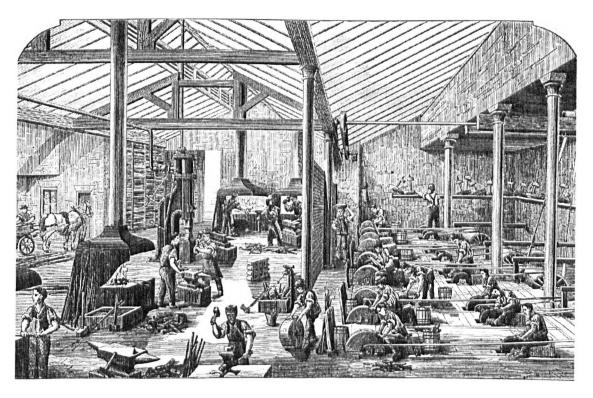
Open plan grinding troughs in a large, glass-roofed shed with steam hammers and hand forges, belonging to James Howarth & Sons (Pawson & Brailsford 1862).
